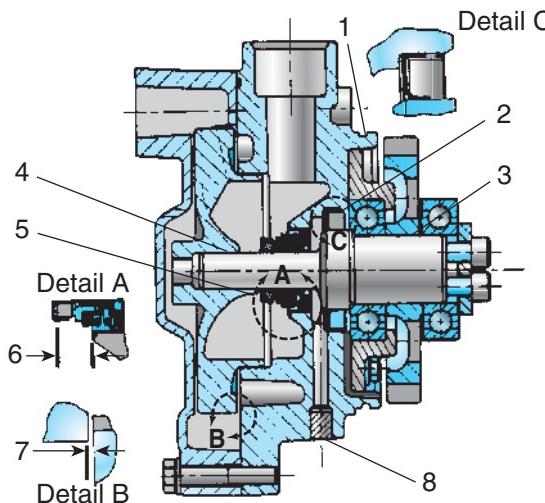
Sectional view of a water pump and housing. (Courtesy of Navistar)
